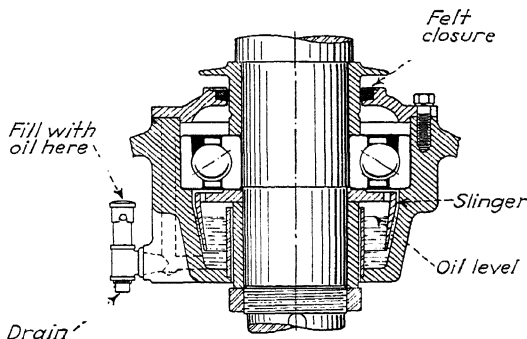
The tapered slinger, clamped to the shaft, sprays oil into the bearing above.
